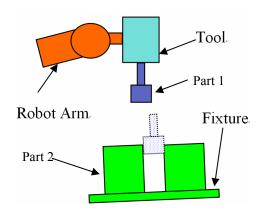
The tight tolerance assembly in a semi-structured environment.
